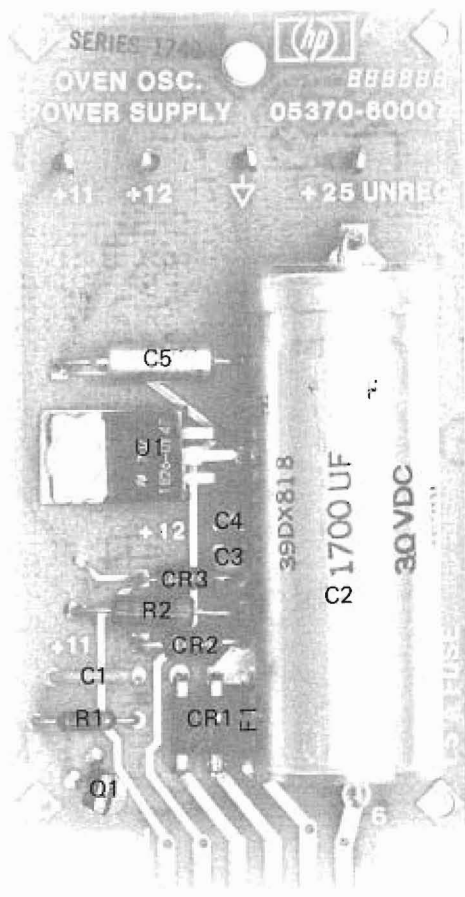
A1/A2/A6 Motherboard/Power Supply Assembly
